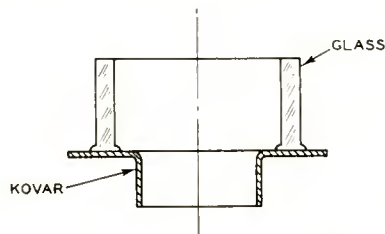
Flange seal made between Kovar cup and glass cylinder.
